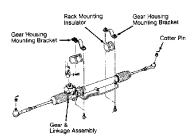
Removing Power Steering Rack Assembly (M30) Courtesy of Nissan Motor Co., U.S.A.
